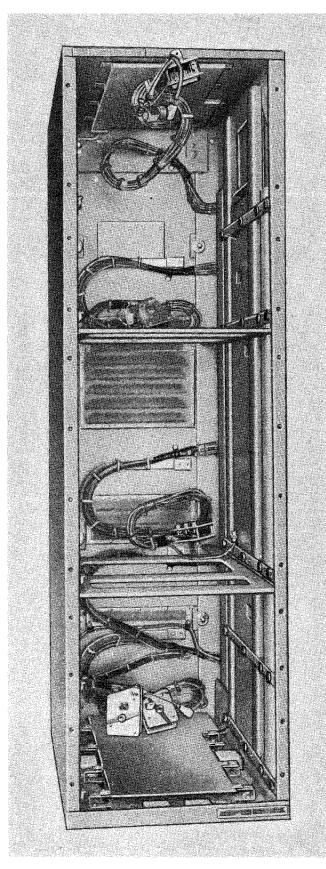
Electrical Equipment Cabinet CY-1571/SRT, Front Oblique View
